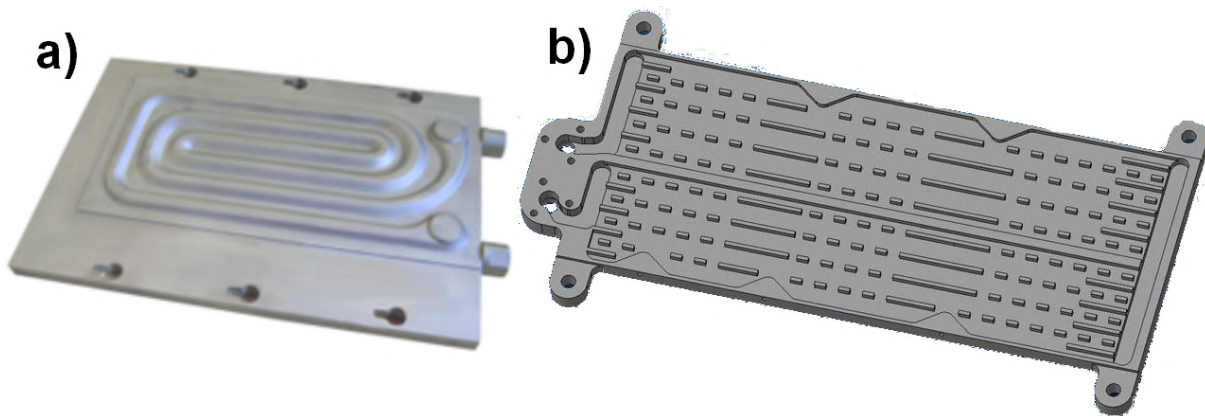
Examples of two cold plates: a) with a straight canal usually assembled via laser or electron beam welding and b) with multiples internal fins usually assembled via brazing.
